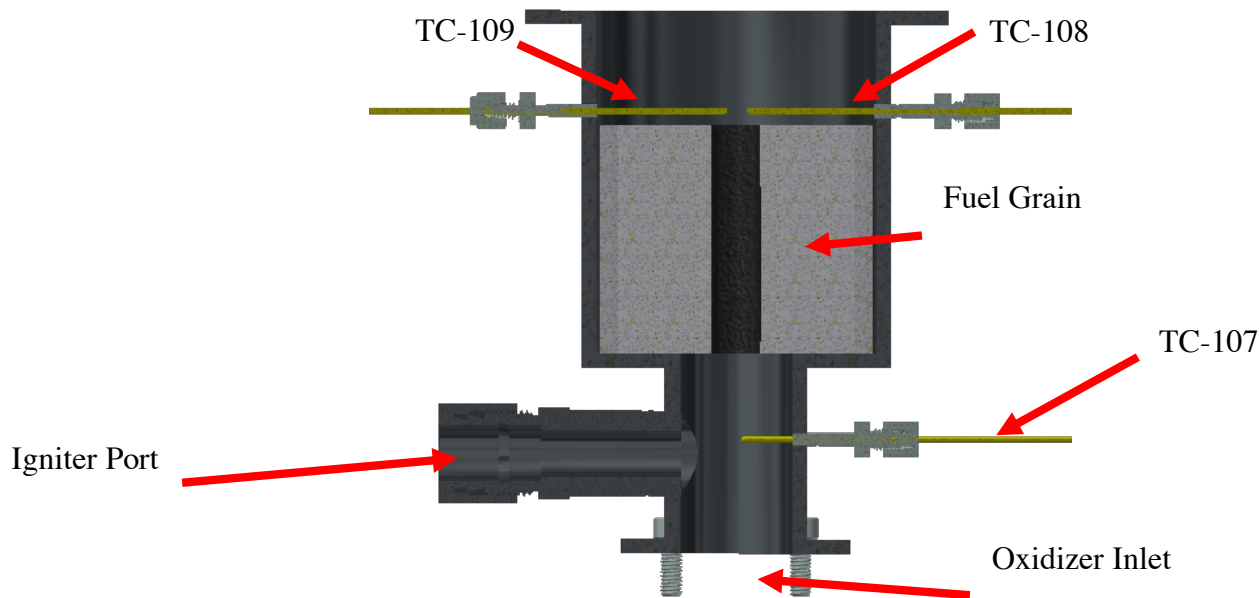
Fuel grain holder assembly illustrating thermocouple placements
